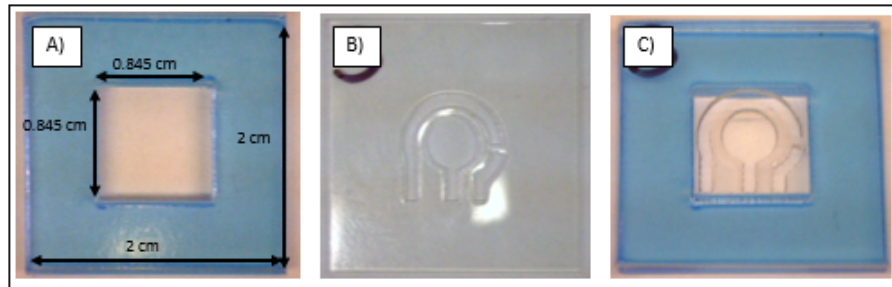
Improved masking jig (A) and mask (B) made from PMMA using a laser cutter. Image (C) shows how the mask is placed on the jig.
